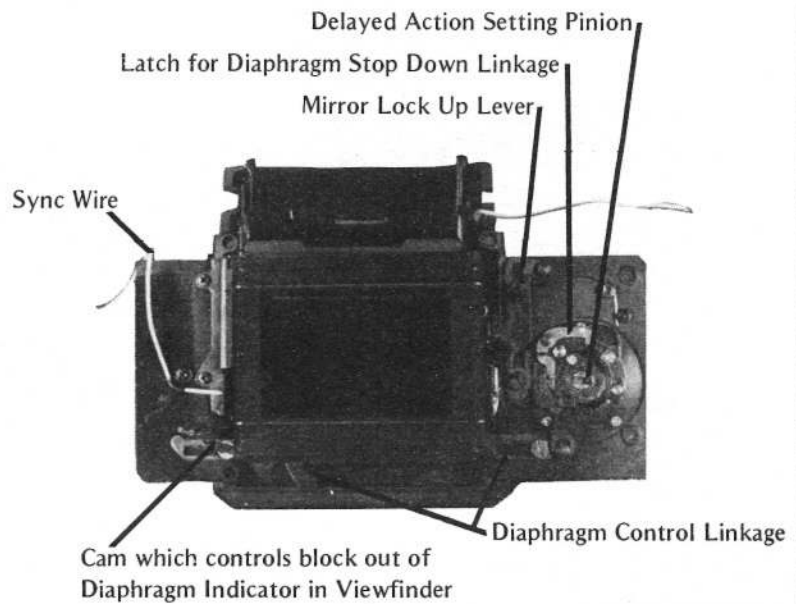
RIGHT SIDE OF MIRROR CAGE
